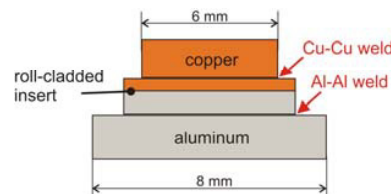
Geometrical arrangement for laser welding of copper and aluminum connections with roll clad inserts for applications in the electronic industrie [4].
